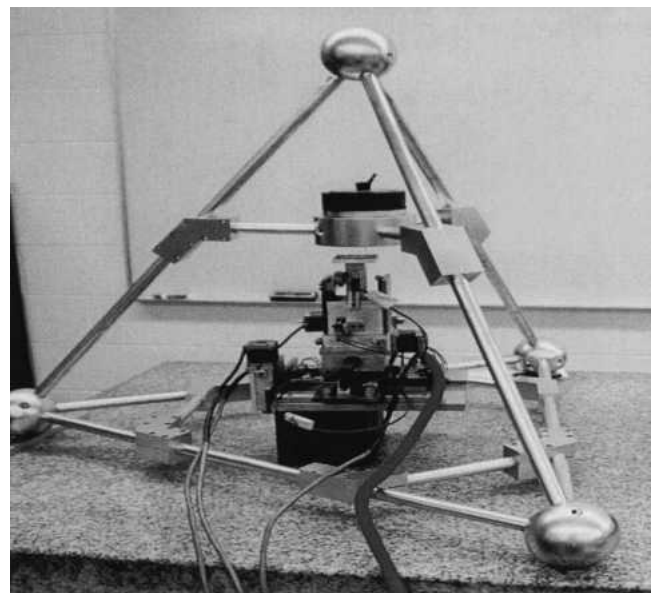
Micro grinding machine tool showing tetrahedral spaceframe surrounding the precision x - y - z table and the extremely high-speed air turbine spindle
